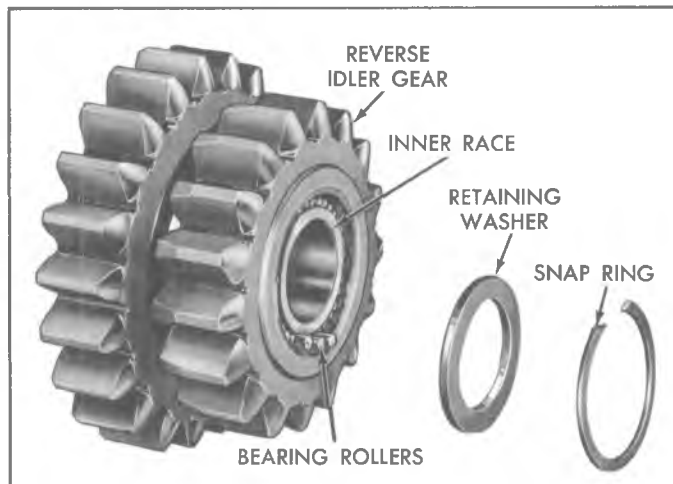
K—Assembling Reverse Idler Gear Bearing Rollers
